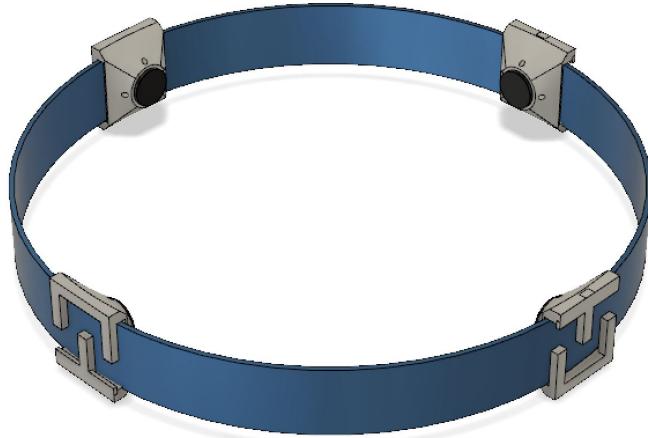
Full System Band And Actuator Layout. CAD done in Fusion360.
